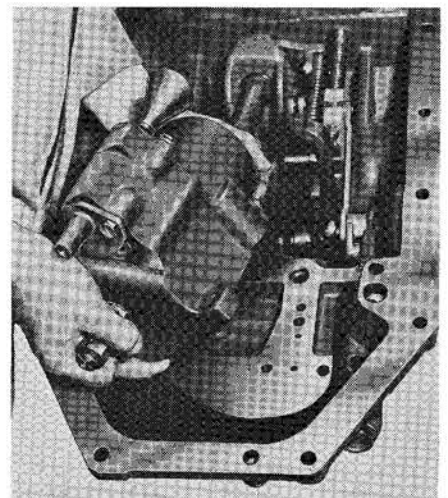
Removing lift cylinder from model "FSM" lift cover assembly.
